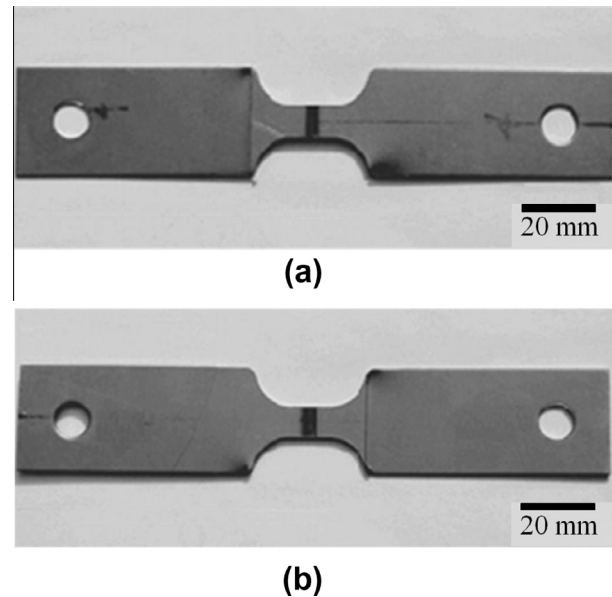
(a) A top view and (b) a bottom view of a laser welded lap-shear specimen.
